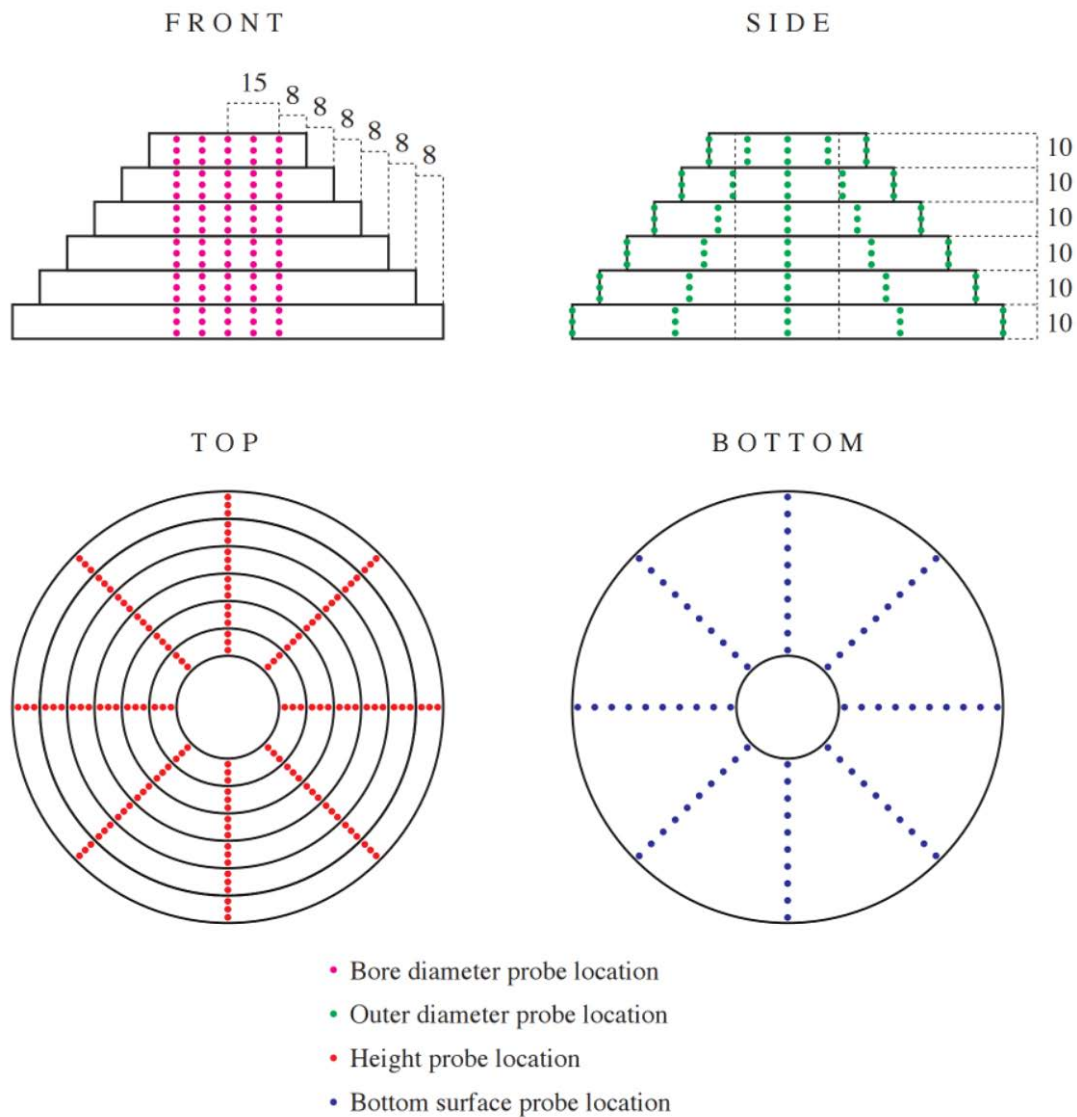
Probe touch locations (all measurements in millimetres) [25]
